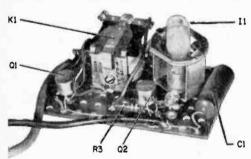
Basic parts layout may seem a bit crowded—parts placement is not critical. Pilot-lamp jewel bezel threads into ring of pilot-lamp assembly that surrounds lamp 11.
